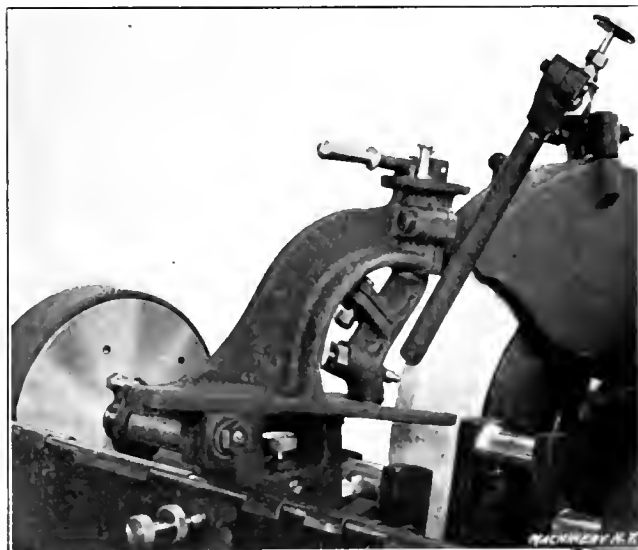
Truing Device for Forming Wheel to Grind Fillets on Journals and Pins of Crank-shafts
